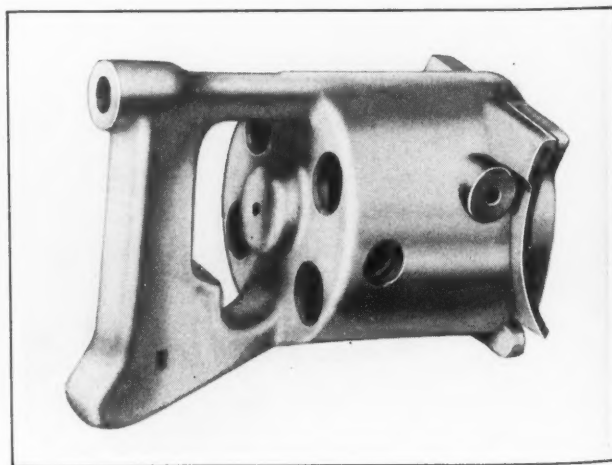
Typical Motor Housing for Portable Electric Tools, Produced in Die Shown in Fig. 9
